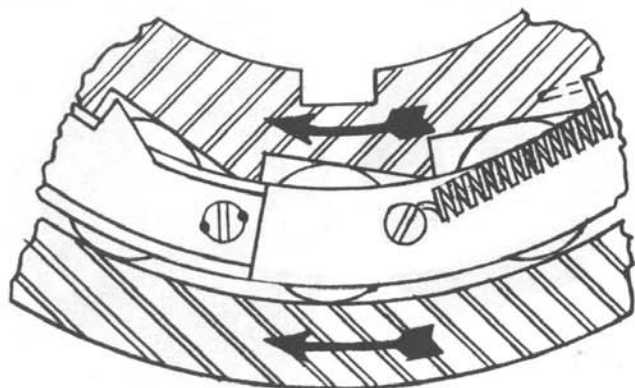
Assembled position of cam unit and roller assembly for CLOCKWISE freewheeling rotation of outer race. Also driving rotation of cam, when looking at coverplate side of outer race.
